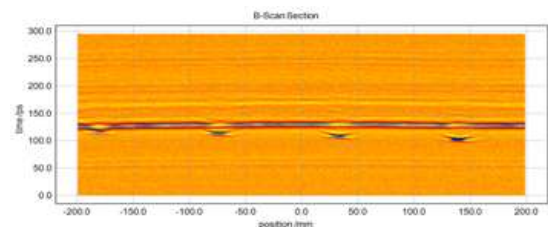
T-Ray testing of flat bottom holes in GFRP solid laminates
